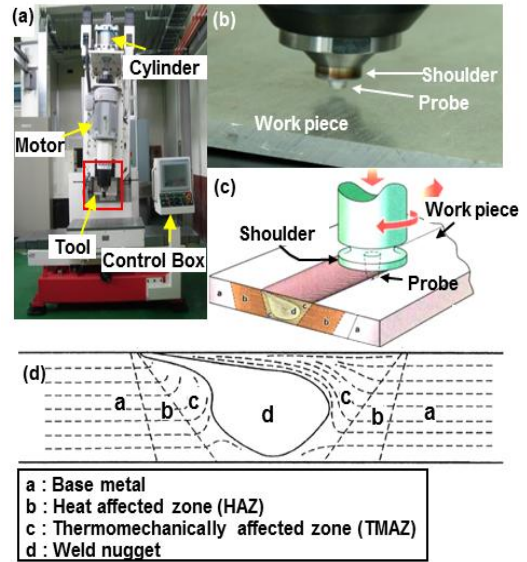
(a) Experimental set up of FSW machine, (b) Set up of welding tool, (c) Schematic drawing of FSW and (d) Different zone after FSW
